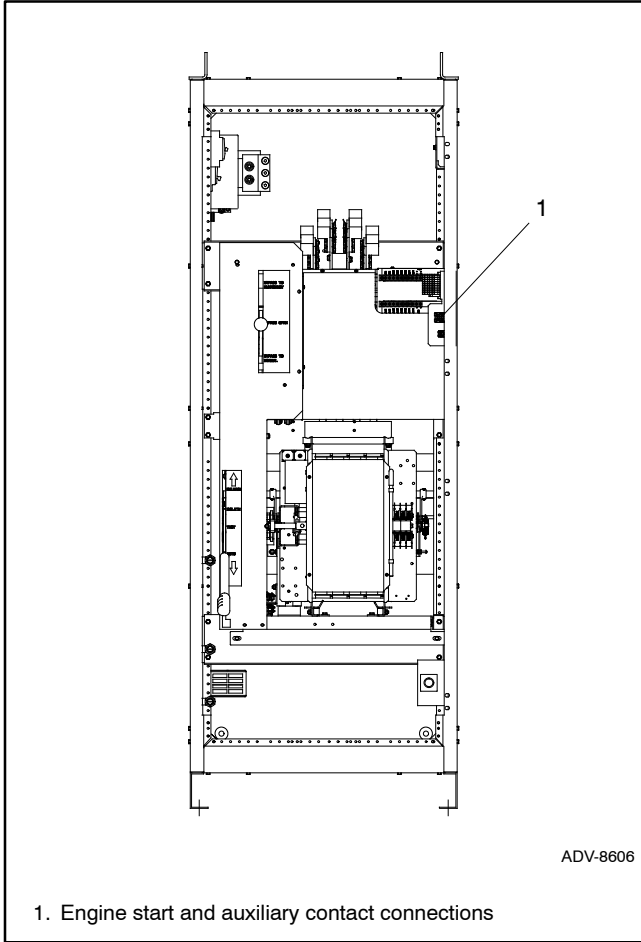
Engine Start and Auxiliary Contacts, 150-400 Amp Models
